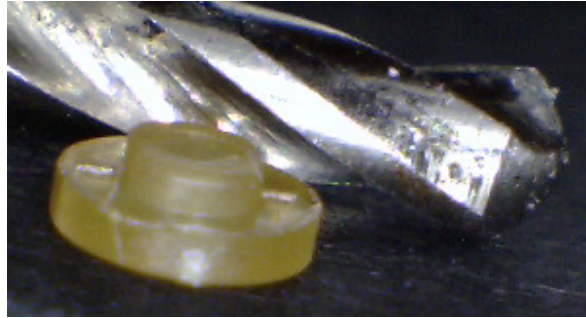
Micro Part with 1/16 (.0625 In.) Drill Bit in Background as Reference. Sample Part Courtesy of Accumold Corporation.
